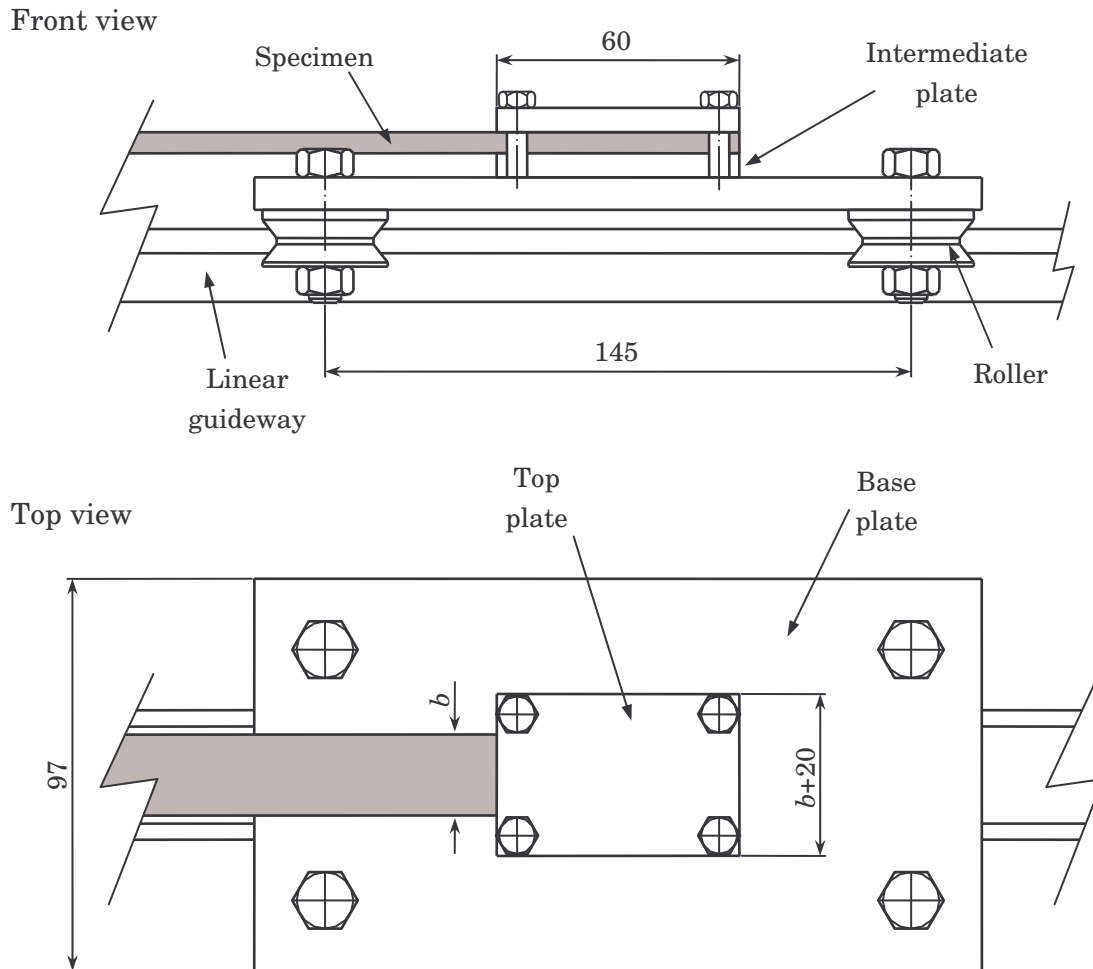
Schema of the assembly of the designed MMELS test rig
